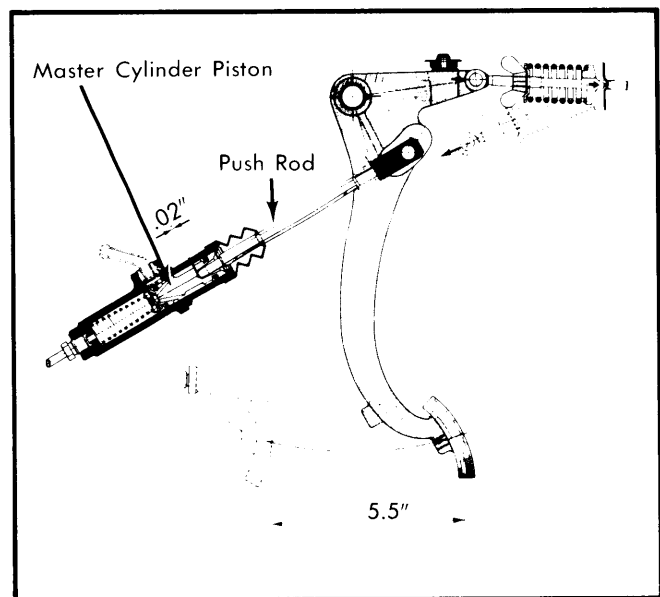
924 Turbo and 928 Clutch Push Rod Adjustment
